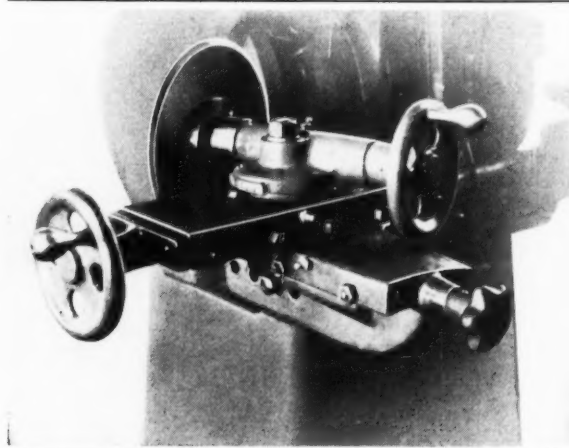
Rear View of the Sykes High-speed Gear Generator
